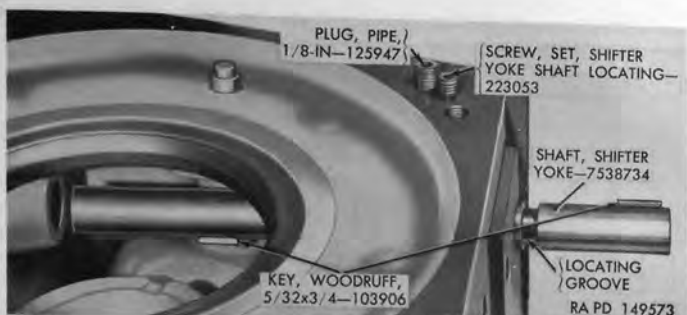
Clutch shifter yoke shaft and Woodruff keys installed.
